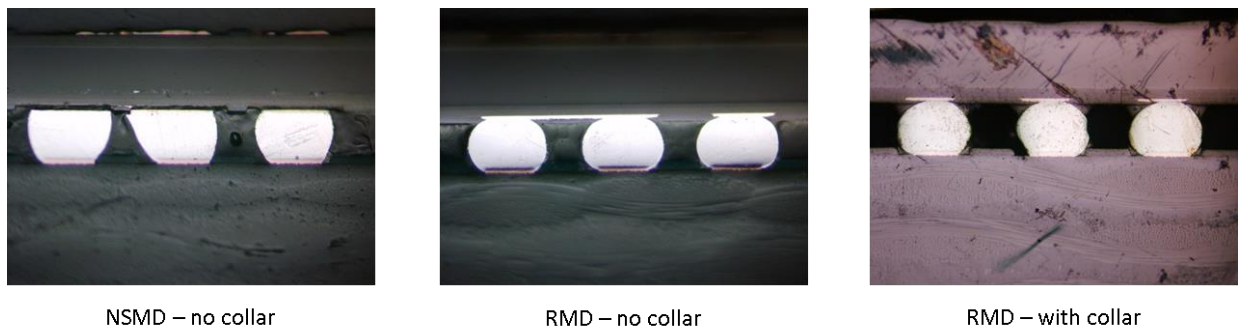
Cross sections of 18.4 mm glass interposers assembled with and without polymer collar
